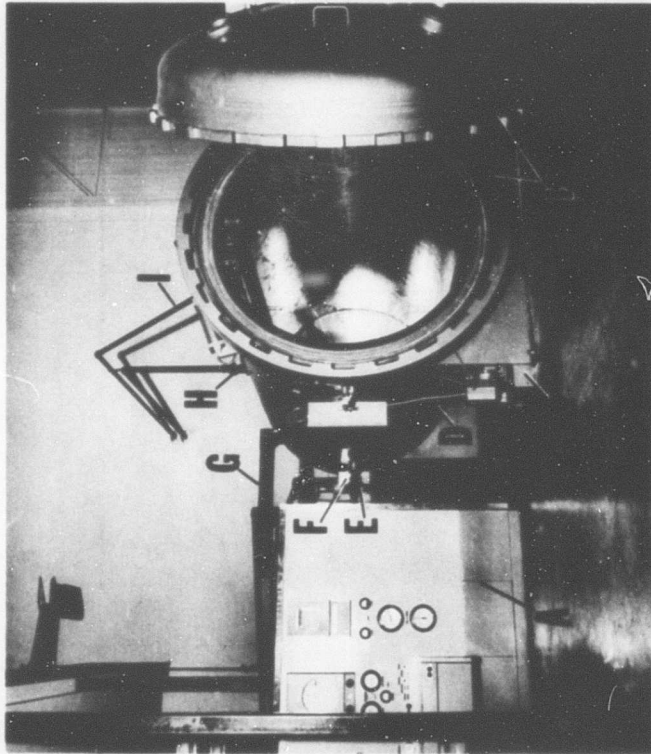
Front View of Autoclave System: A, Control Console; B, Door and Lock Ring; C, Hydraulic Pump for Door Lock Ring; D, Pressure Vessel; E, Air Inlet Control Valve; F, Junction Box for Heater Power Lines; G, Wireway Containing Thermocouple and Vacuum Lines; H, Air Exhaust Control Valve; I, Air Exhaust Pipe From Vessel Safety Valve.
